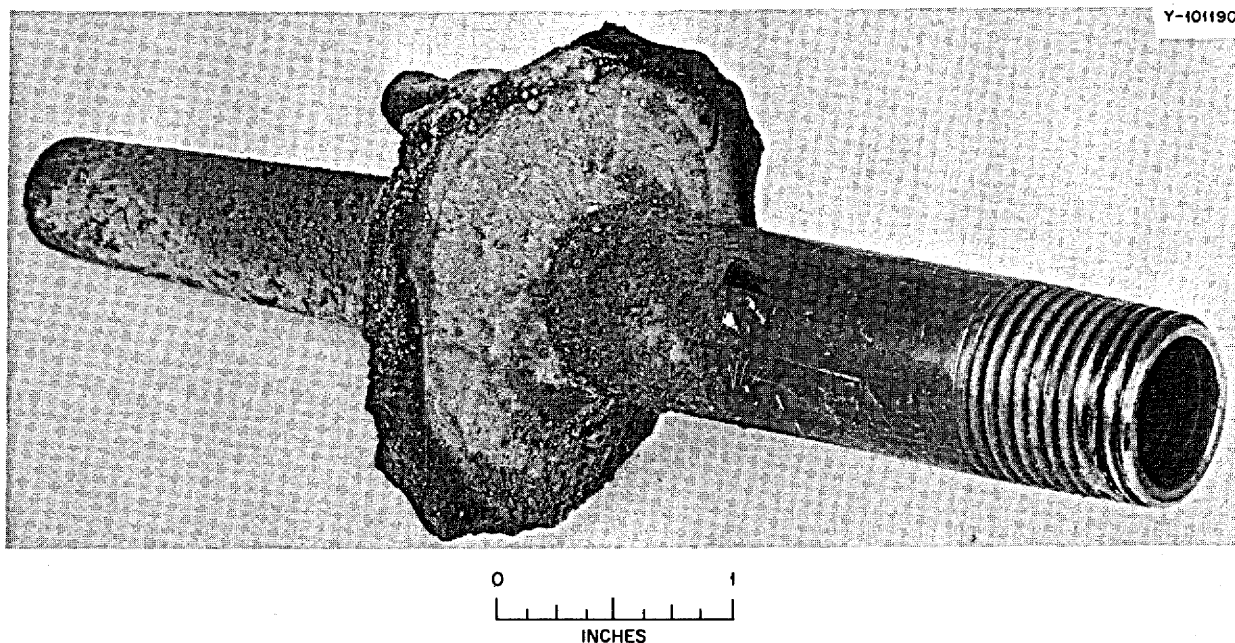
Photograph of Thermocouple Well Removed from the Inlet Line to the Radiator of the MSRE. Much of the discoloration and the fragments of metal resulted from cutting the part out with a coated welding electrode.
